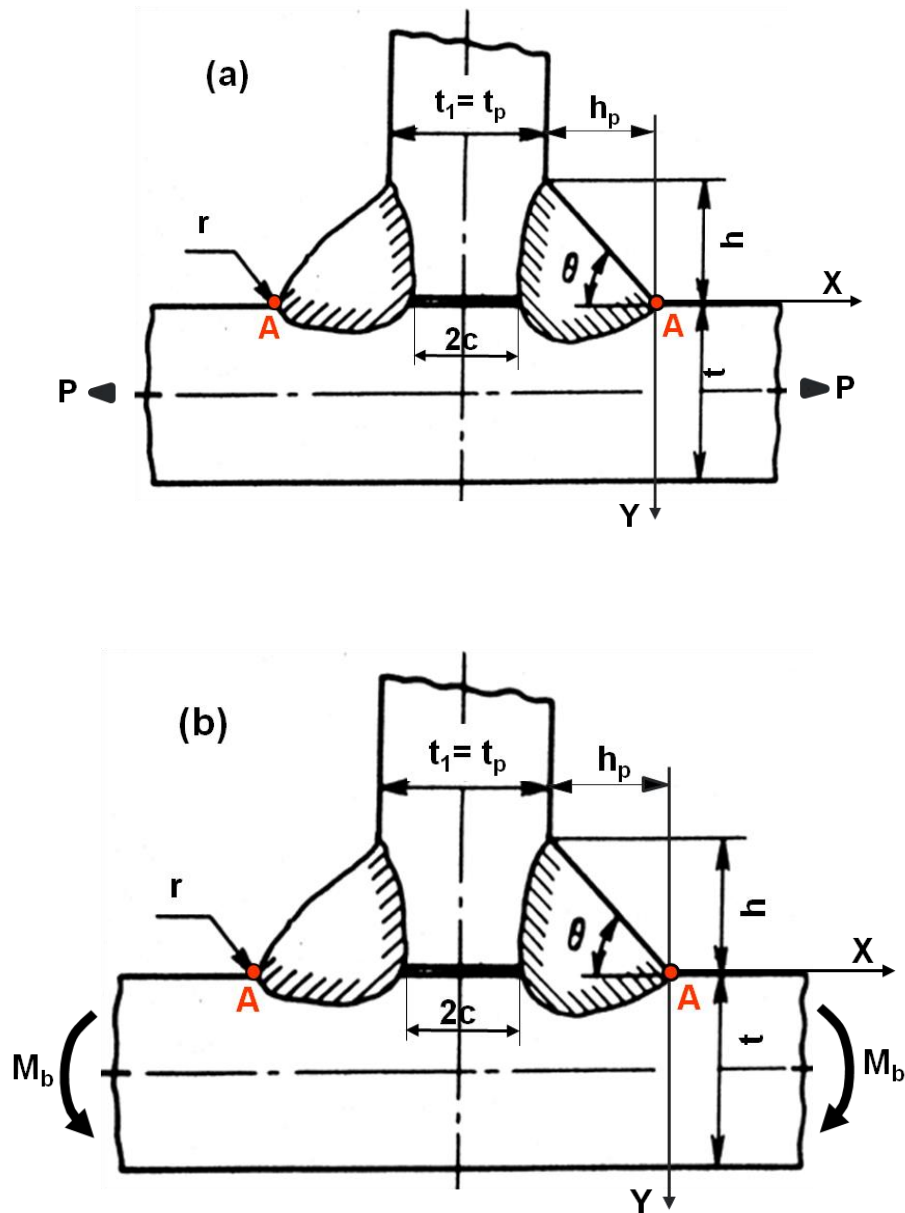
Non-Symmetric fillet weld under (a) axial load (b) bending load
